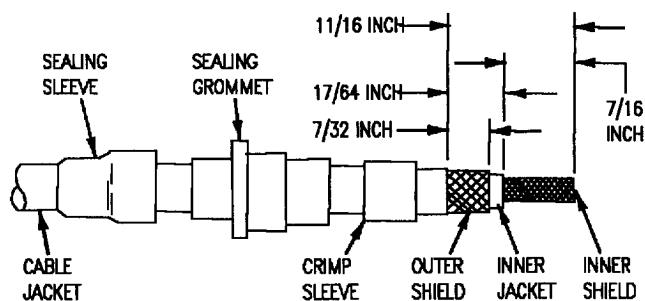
DPX2NE41723-139-04 Connectors (Sheet 3)
